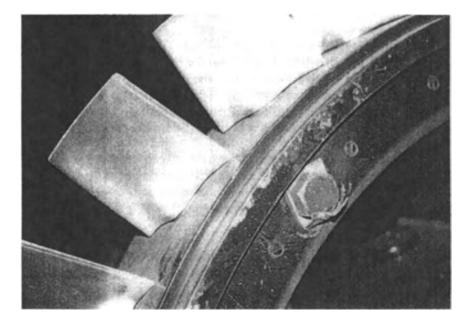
[R06] Close view of the elaborate attachment of the fan blades in the rotor shown in Figure 5-6.
